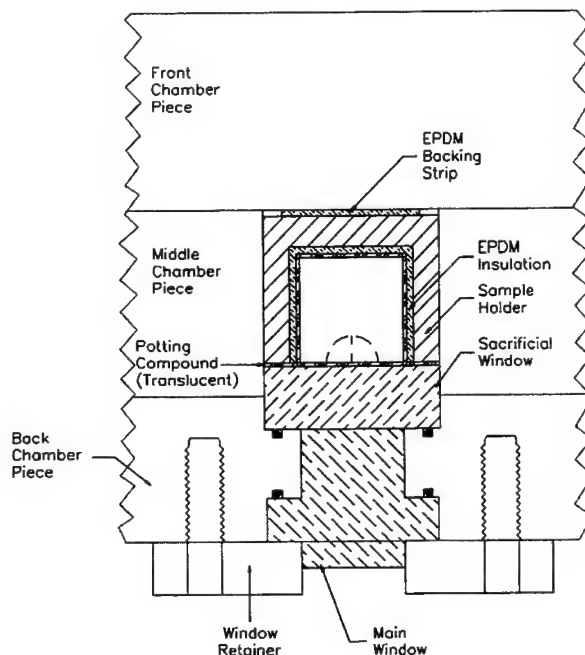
Composite Cross-Section View of FSIC Chamber Assembly (from top)
